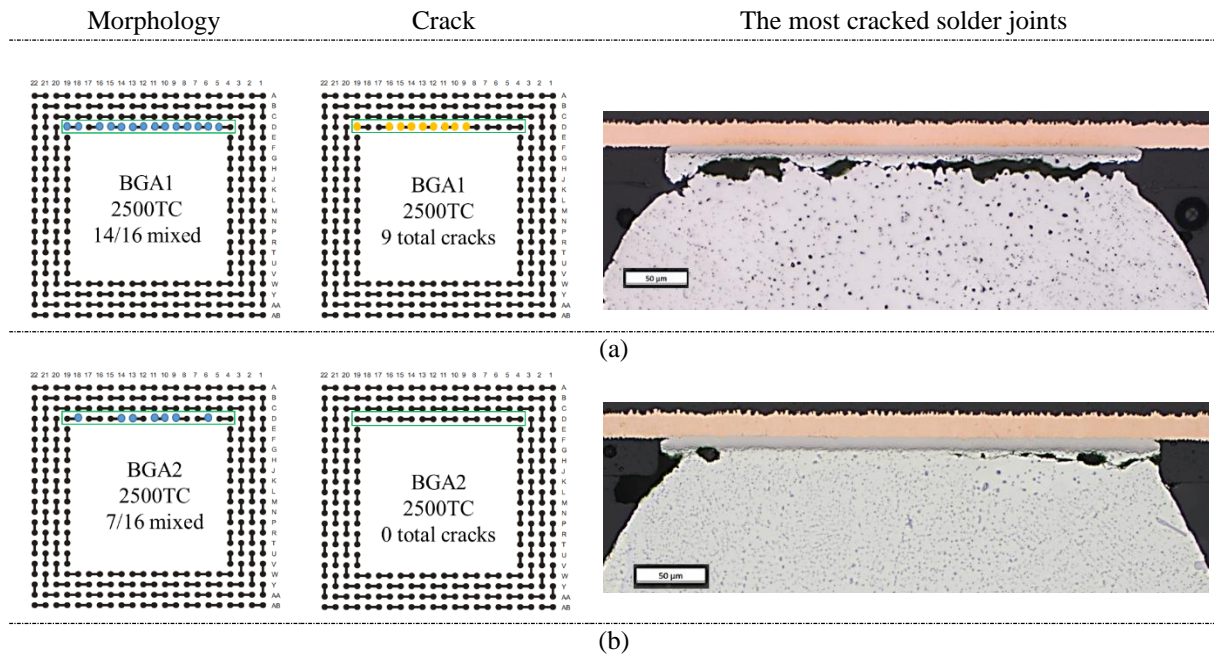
Impact of the mixed morphology on the solder joints cracking
